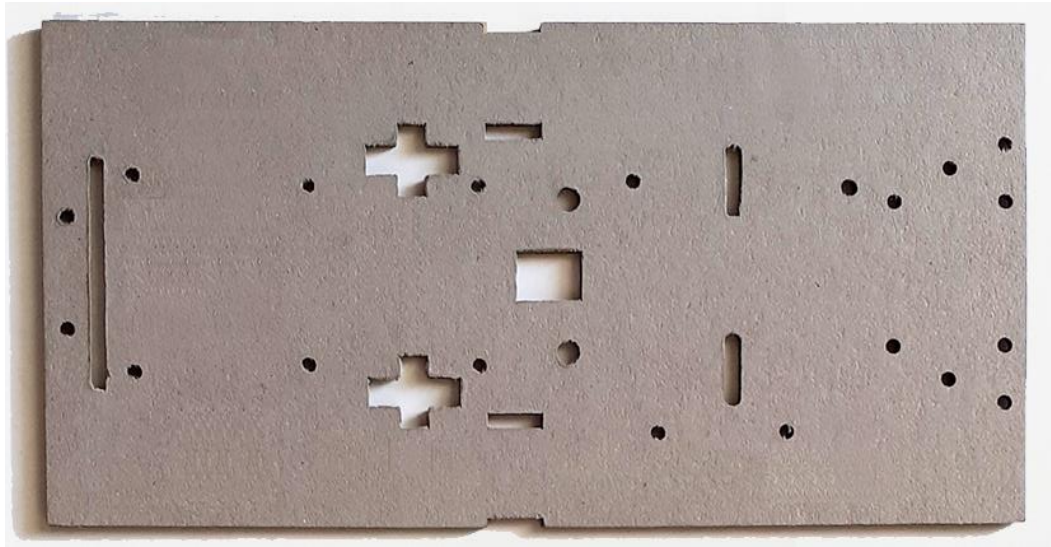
Indicative design for chassis made by a sheet of stiff cardboard
